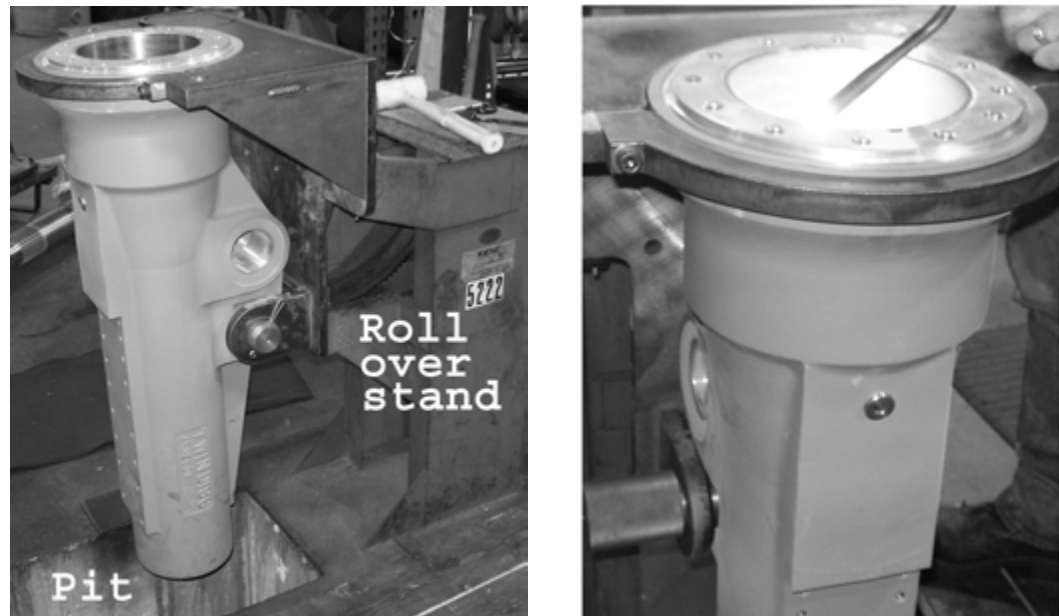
Thrust Tube Housing In Stand (left), and Heat Housing in Bearing Area (right)
